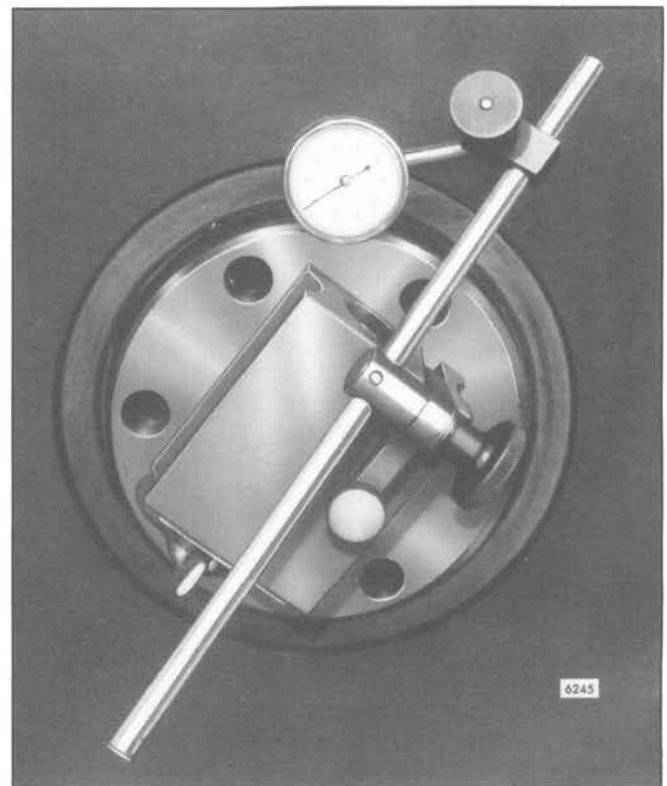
Checking Crankshaft Rear Seal Squareness
